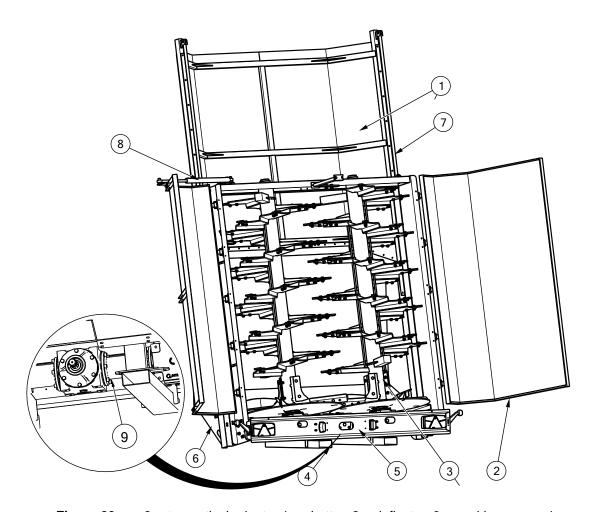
2-rotor vertical adapter 1 – shutter, 2 – deflector, 3 – working auger, 4 – fork support, 5 – light bar, 6 – main frame, 7 – shutter actuator, 8 – deflector actuator, 9 – gearbox
